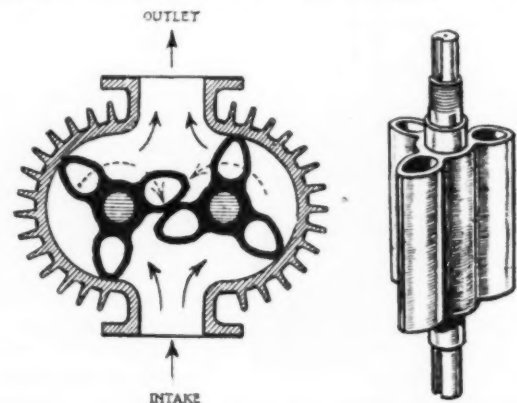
THE BERK SUPERCHARGER WITH 3-BLADED ROTOR
